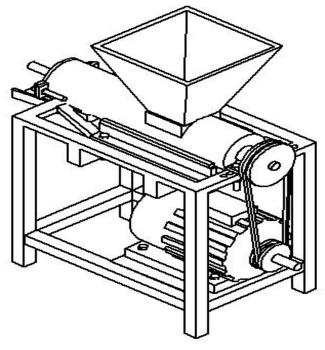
Isometric View of Fish Feed Pelletizing Machine
